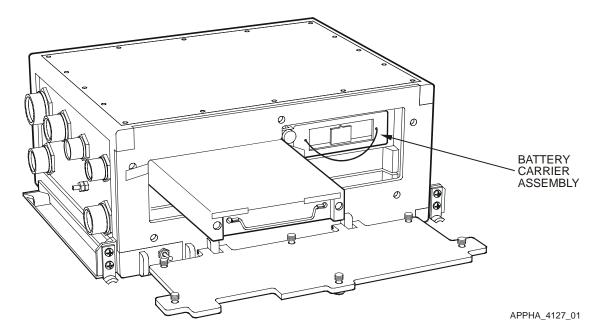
Remove/Replace Battery Carrier Assembly PN 59727-1 for PU NSN 7021-01-475-0217/NSN 7021-01-487-0579
